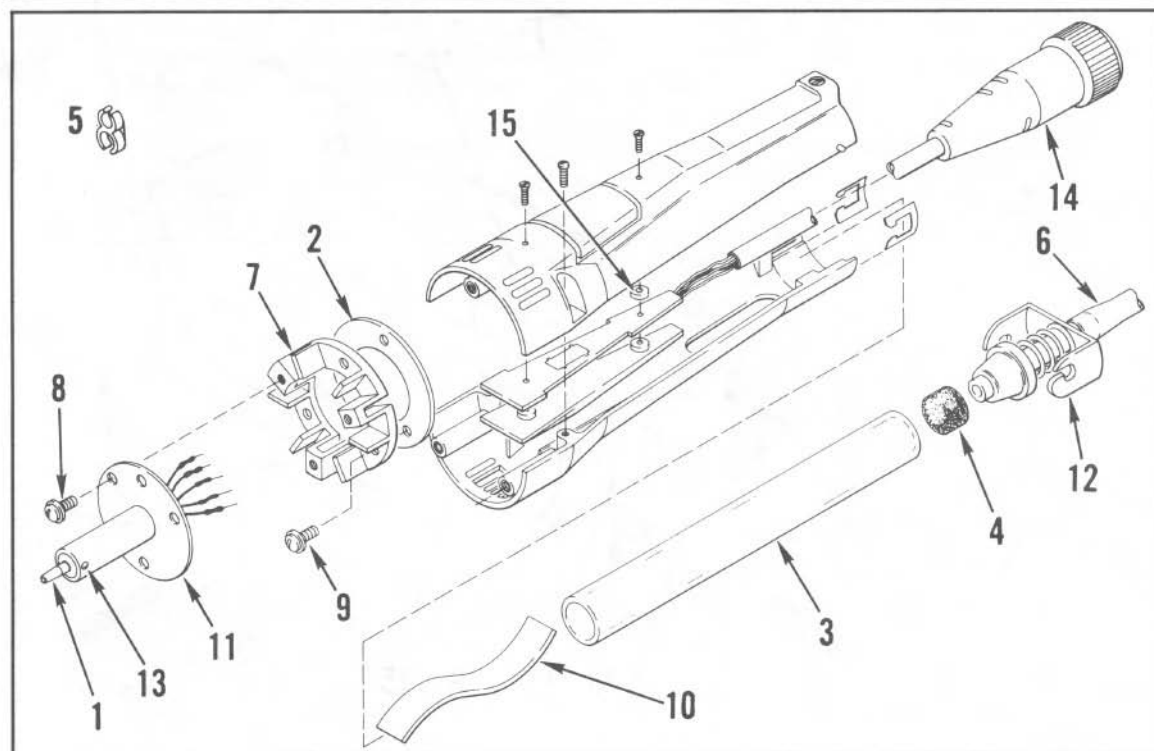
REPLACEMENT PARTS FOR SX-65 EXTRACTOR ASSEMBLY
